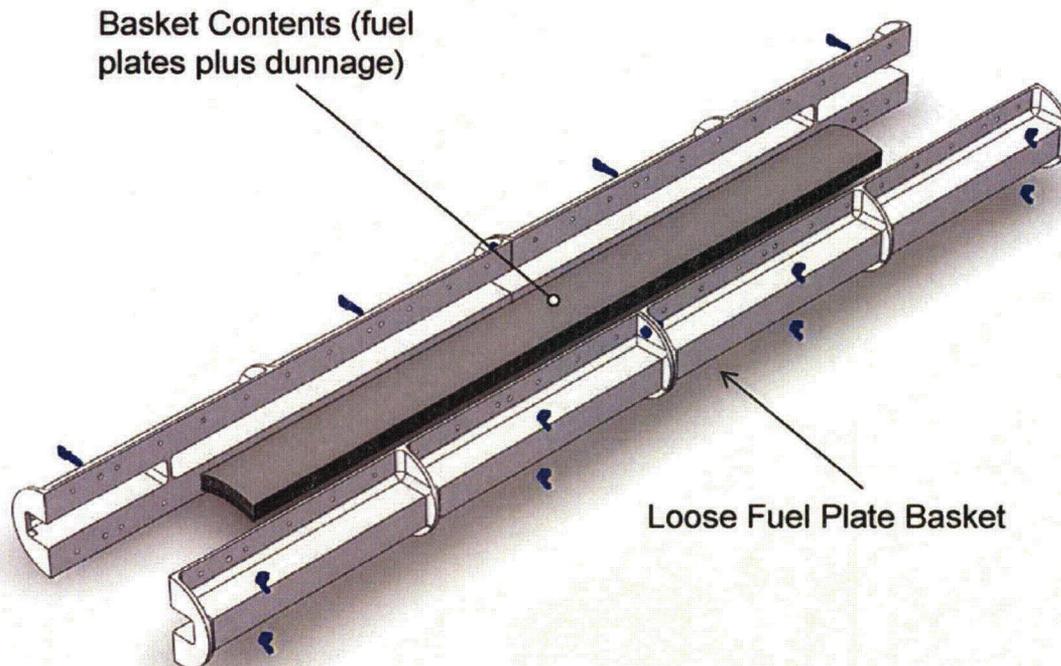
Loose Fuel Plate Basket – Exploded View
